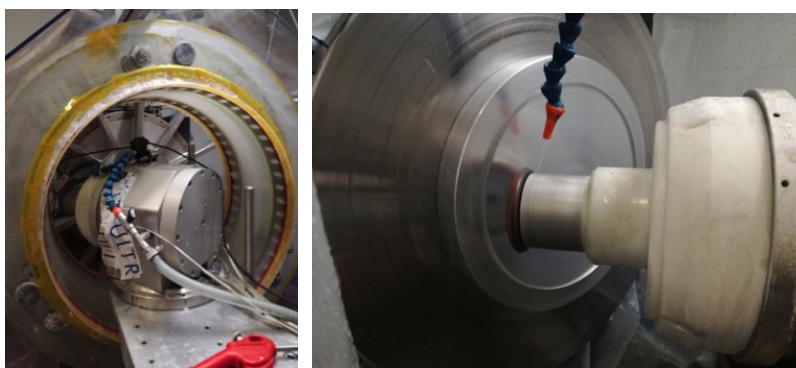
(Left) The shell on the lathe during the grinding phase. (Right) The detail of the grinding wheel during tests on samples.
